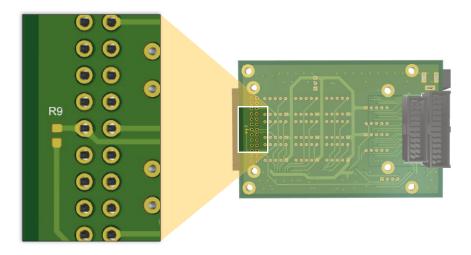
Location of the control pin selection resistor R9 (Bottom side of PCB)
